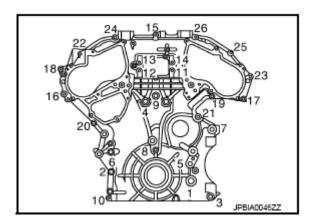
Identifying Front Timing Chain Case Mounting Bolts With Tightening Sequence Courtesy of NISSAN NORTH AMERICA, INC.
